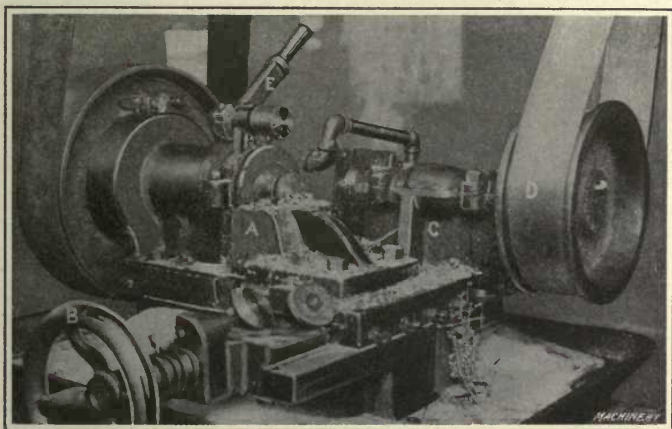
Machining Gas Plugs on Holden-Morgan Special Plug Machine
